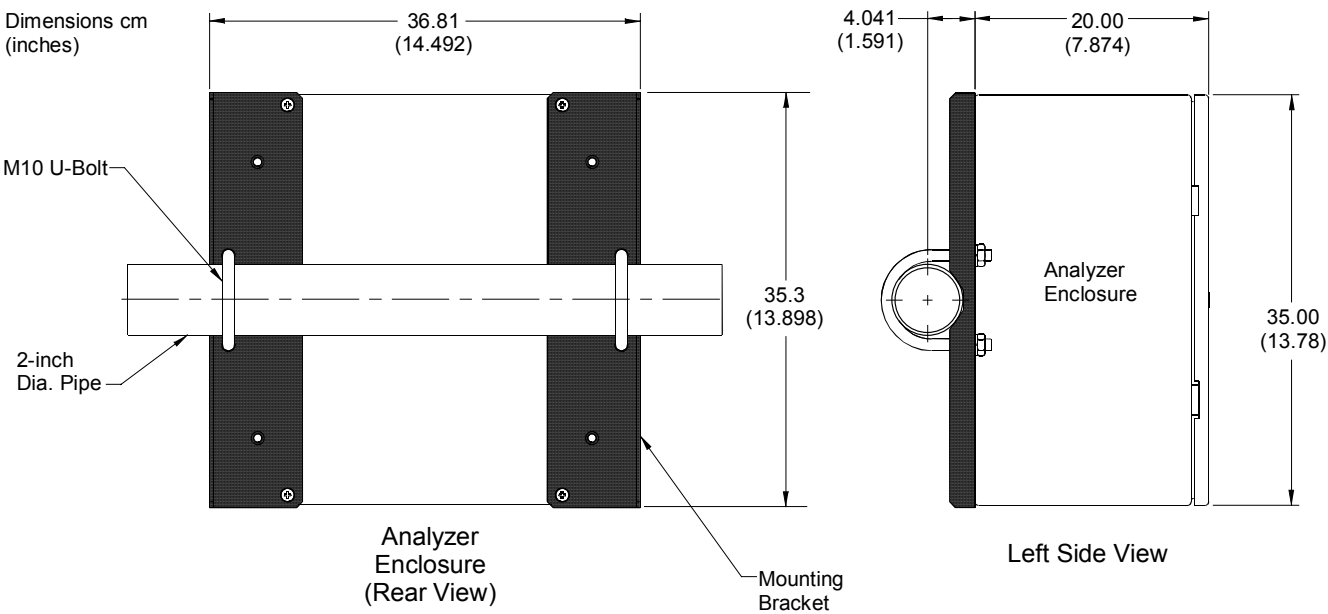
Analyzer Enclosure Pipe Mounting Dimensions, Approximate for reference only
